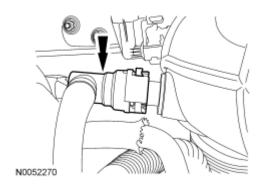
Locating Engine Breather Courtesy of FORD MOTOR CO.
